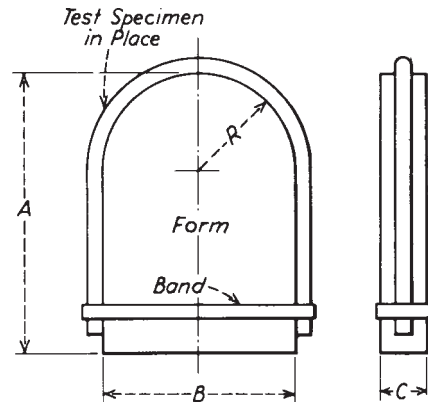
Test Specimen on Form (see Table 3 and 4)
